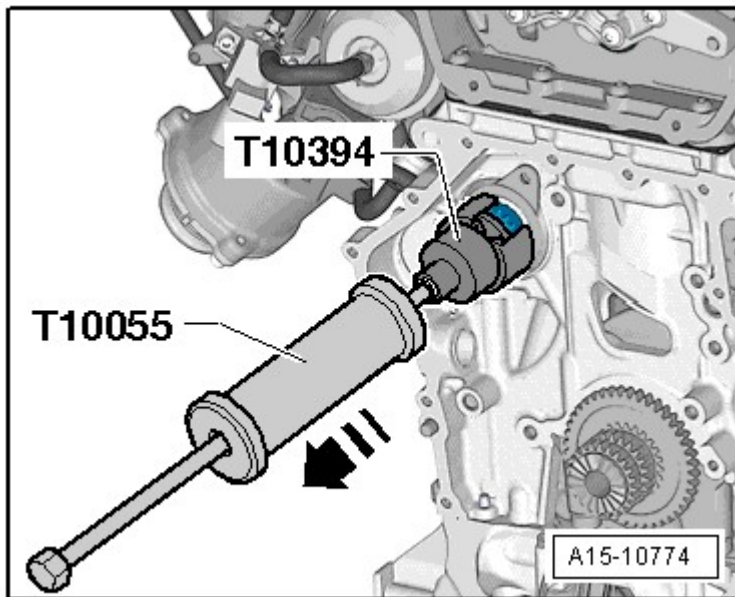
Identifying Installation And Operation Of Puller -T10055-
